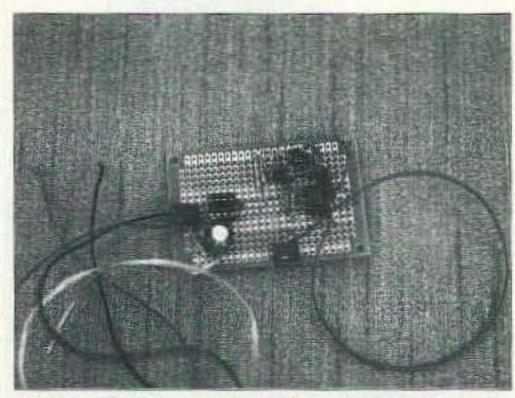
Photo B. The actual circuit (audio amp still to be plugged in — that was done in final assembly).
